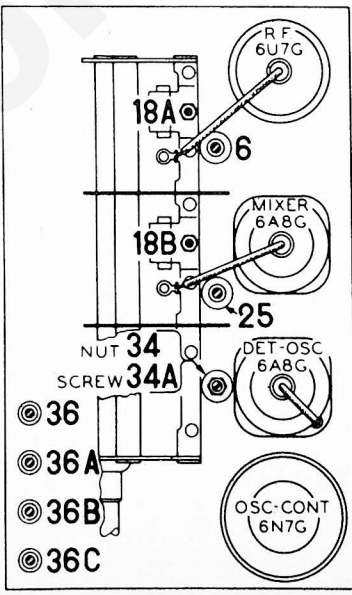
Top View of R. F. Unit Showing Compensator Locations
